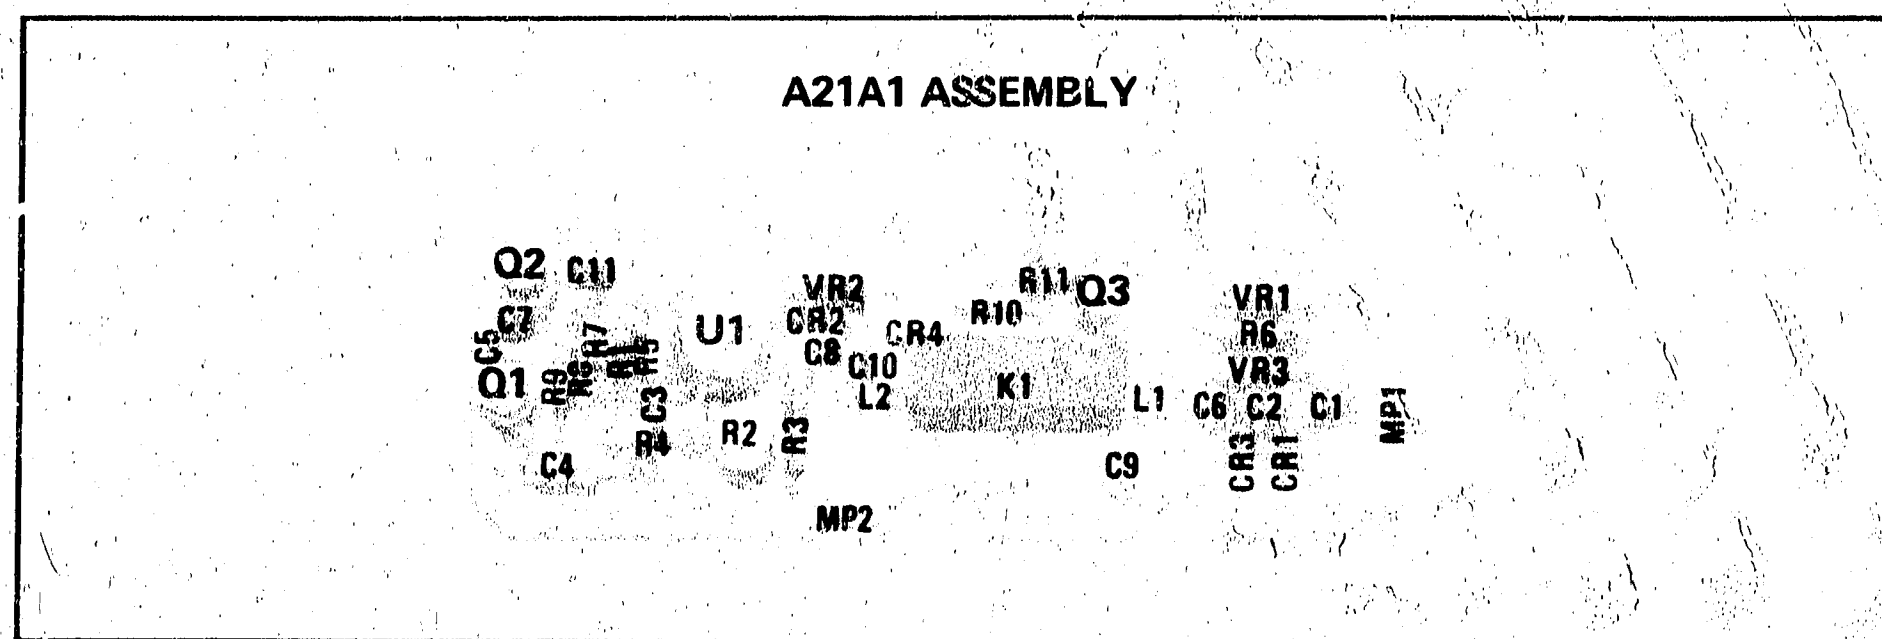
A21A1 Reverse Power Protection Board Assembly, Component Locations
